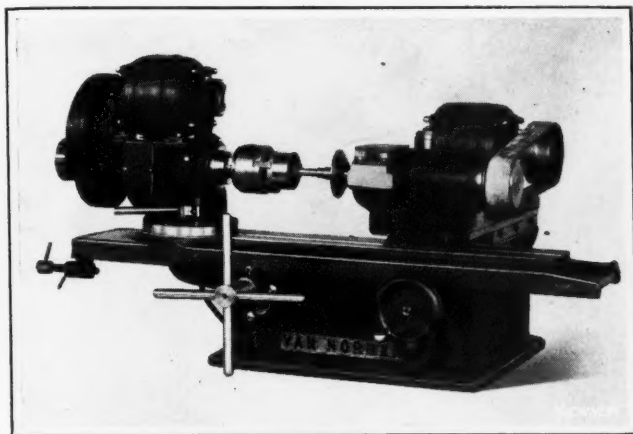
An Internal Grinding Operation performed by attaching a Small-wheel Arbor to the Wheel-spindle
